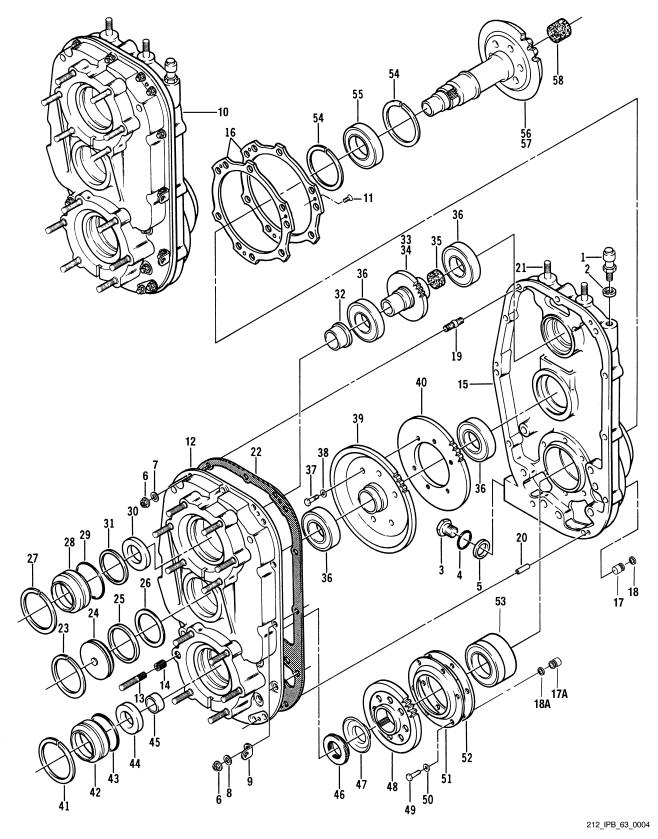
Auxiliary Equipment Kit, Quill Assembly
